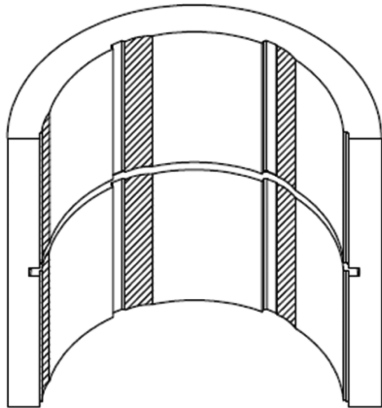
A half geometry of 6-Pad×2-Row leading-edge tapered-pad cylindrical TGB.
